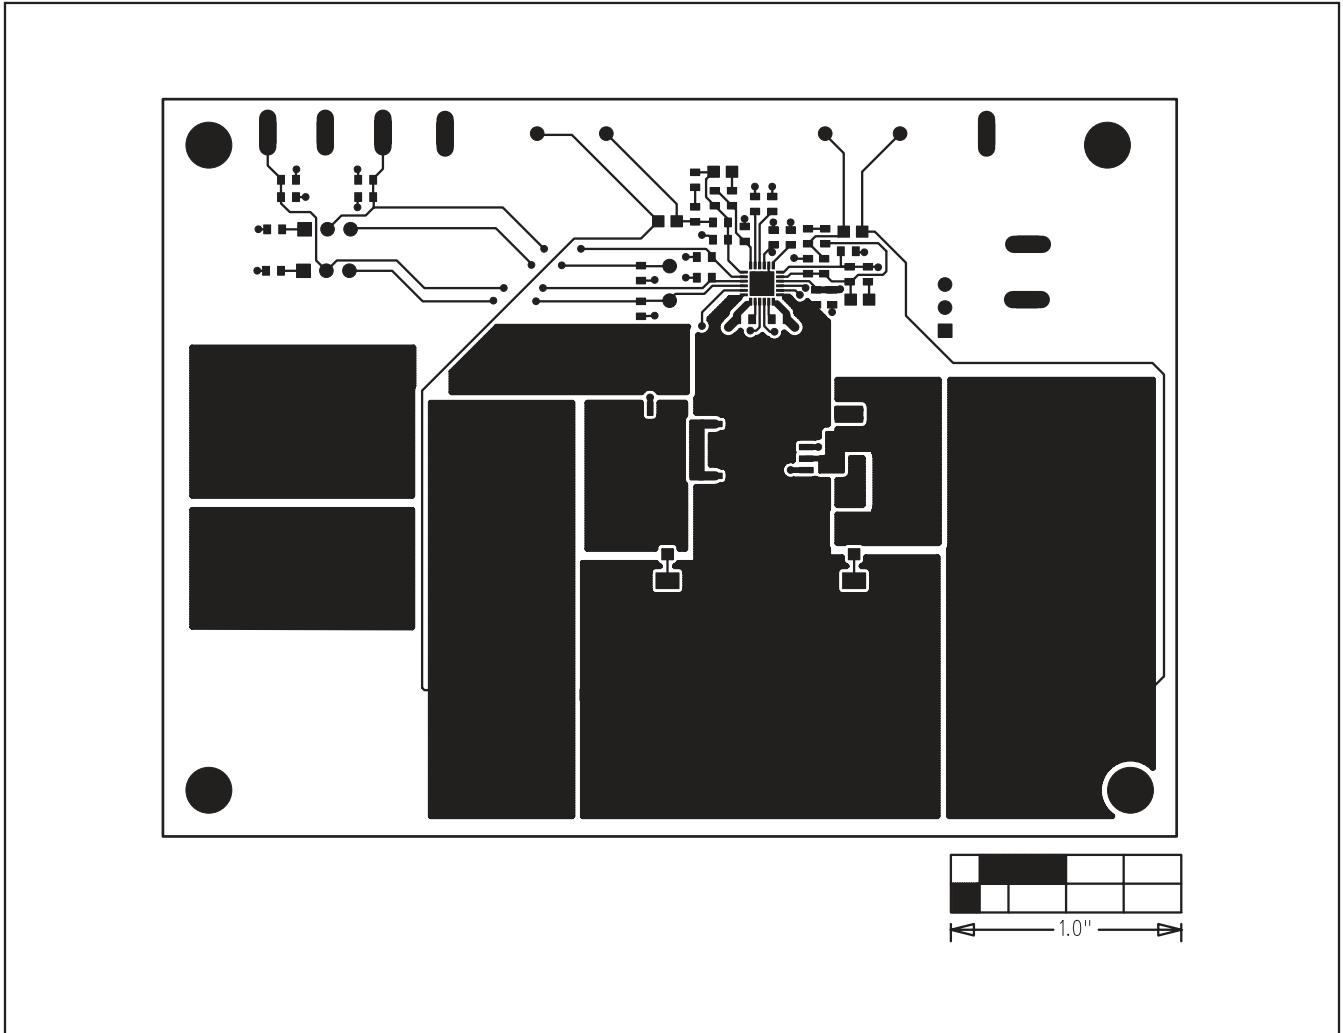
MAX15023 EV Kit PCB Layout—Component Side
